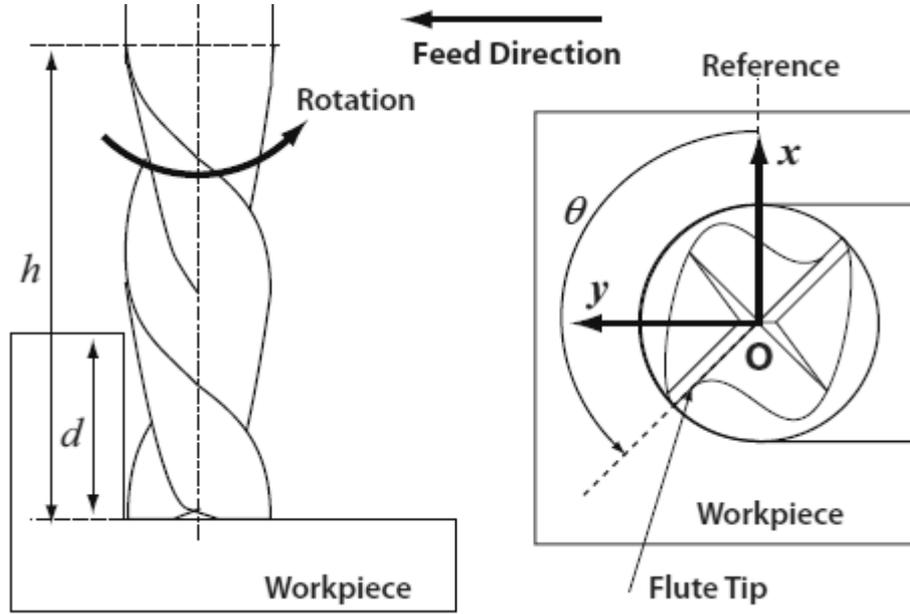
Geometry of a two-flute end-milling cutter and workpiece in full immersion
